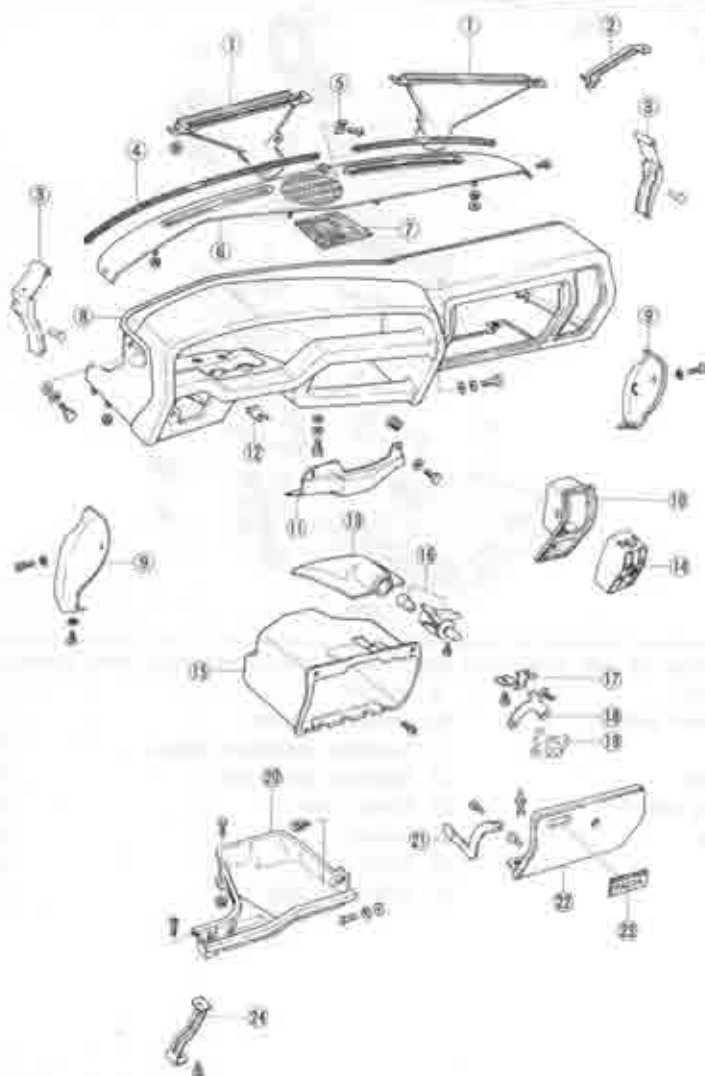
Instrument panel components (Left hand drive vehicles)
